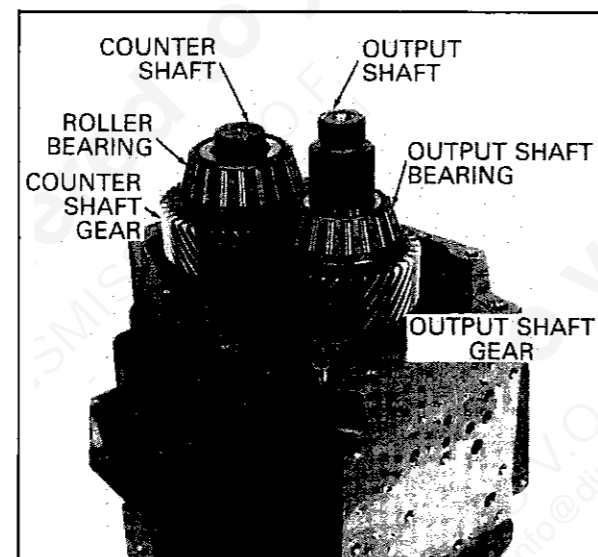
OUTPUT SHAFT, GEAR AND BEARING REMOVAL
